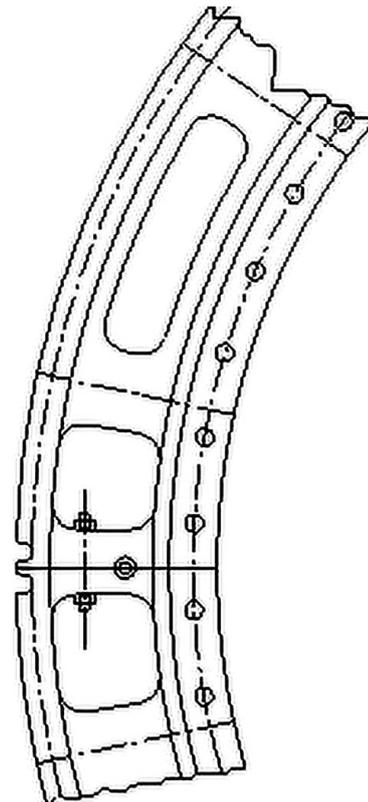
Additionally weakened gear by decreasing the rim thickness due to connecting bolts (position 2 from Fig. 7)
